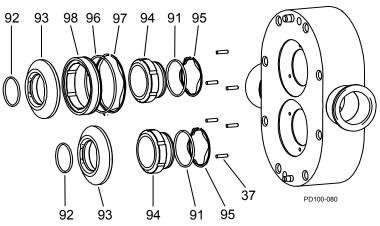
Single (Bottom) and Double (Top) Mechanical Seal
